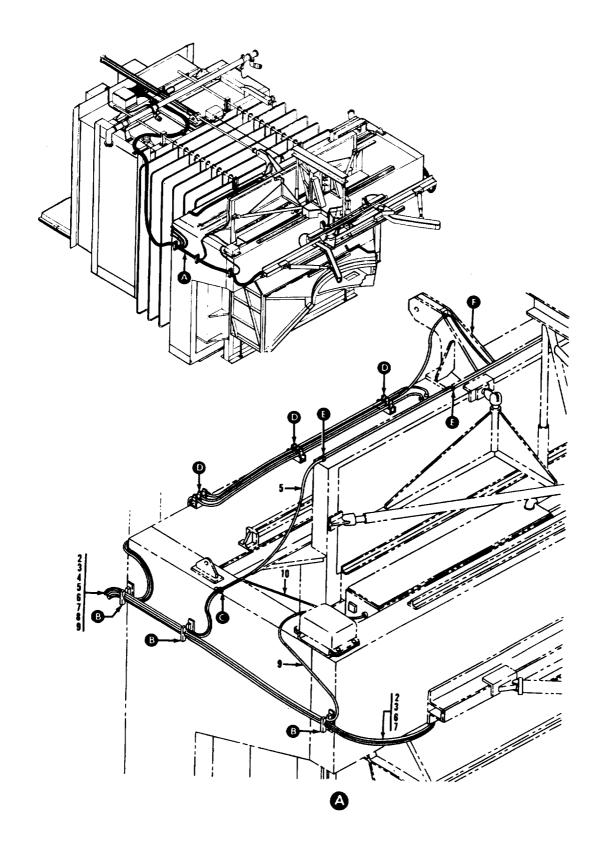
Electrical Equipment Installation (Sheet 2 of 19)
